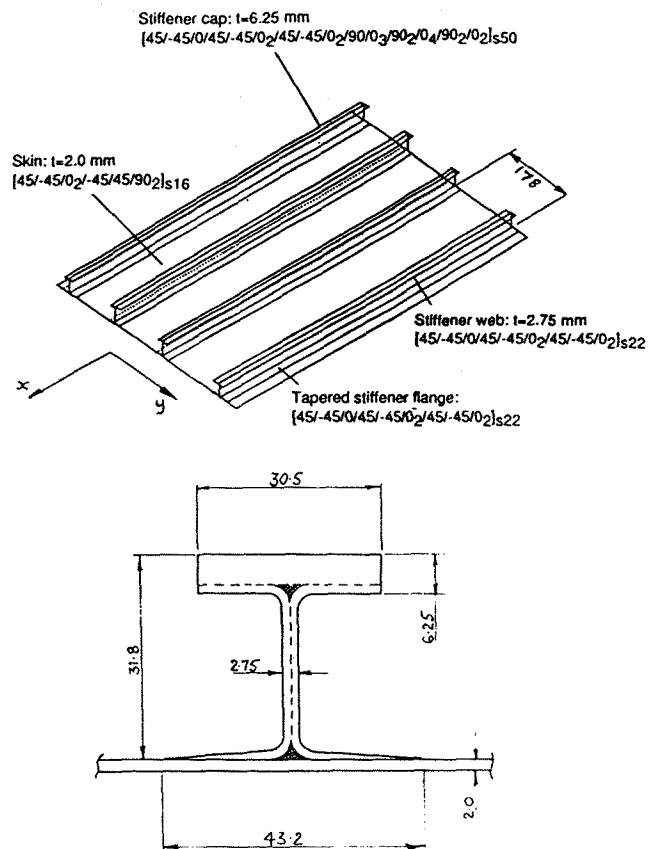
I stiffened panel 865mm x 610mm and stiffener detail.
